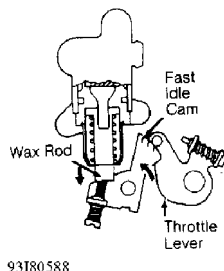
Checking Fast Idle Cam & Throttle Lever
